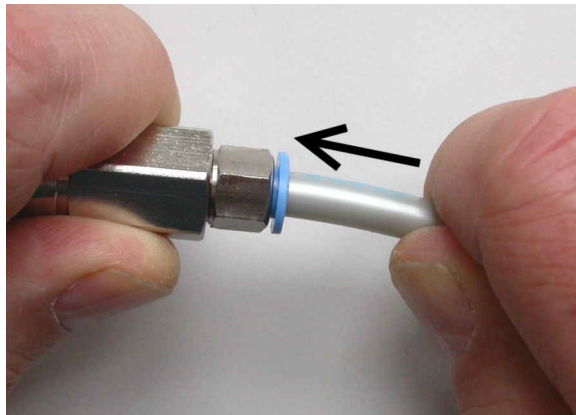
Assembly of push-pull adapter (left) and 6 mm tube (right)
